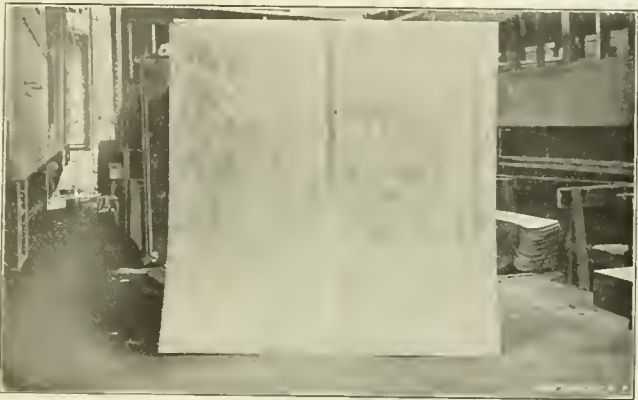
Piece of Head Lining made of Patent Level Stock, joined by Oxy-acetylene Welding
